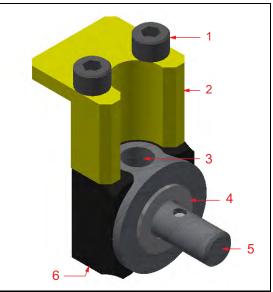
Optional adjustable leveling foot (P/N 91589), sold separately, for bores 8– 35.8" (203–909 mm)
